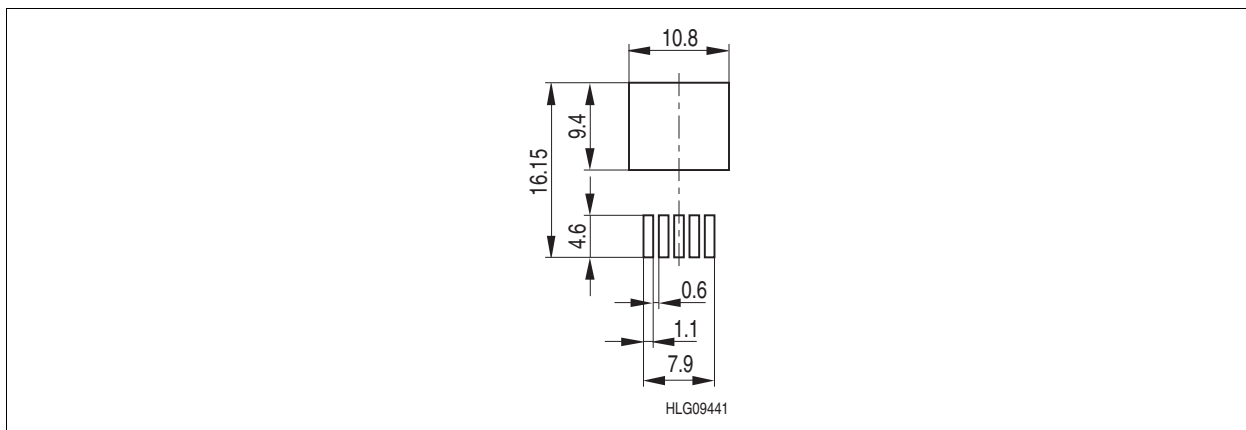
Footprint PG-TO263-5, Reflow Soldering Type
